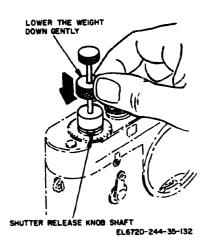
Adjustable weight with center shaft 42-253,01-Z1A22.
